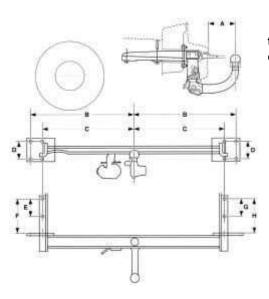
Mounting dimensions trailer coupling with removable ball of «Caravan»
